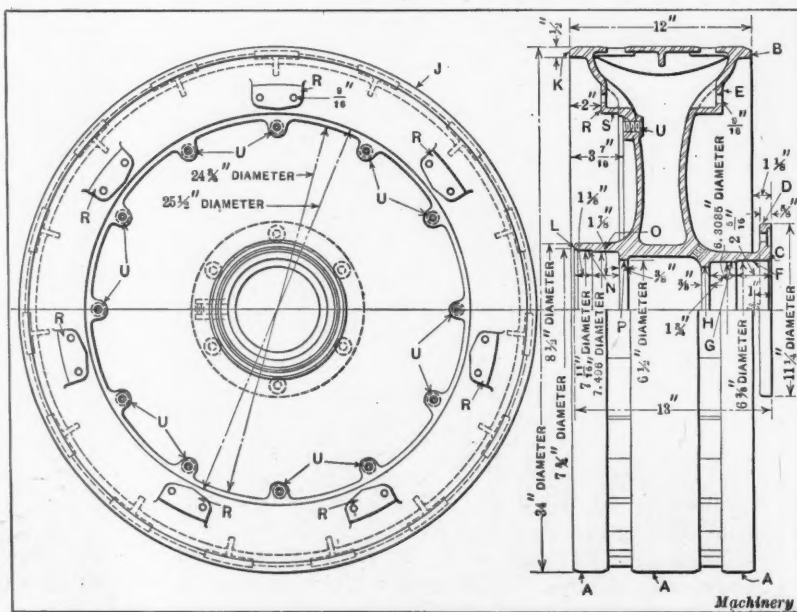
Side and Cross-sectional Views of Double Disk Steel Wheel for Packard Five-ton Truck
